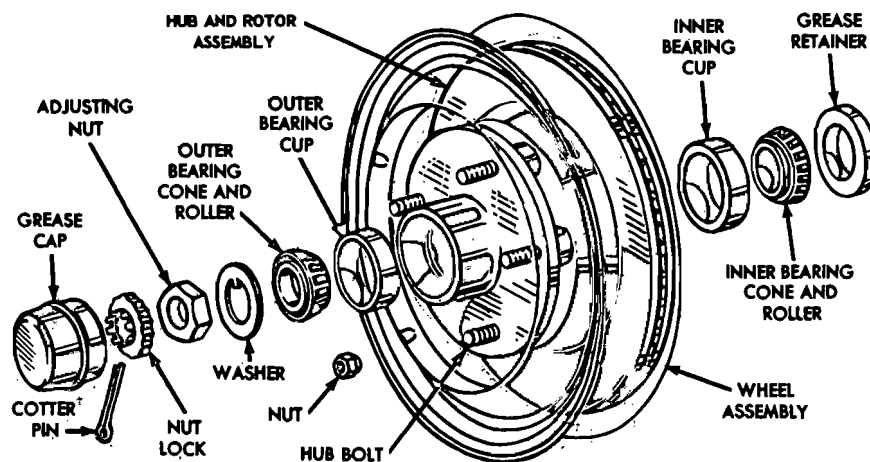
Front Hub, Bearing and Grease Retainer Drum Brakes
